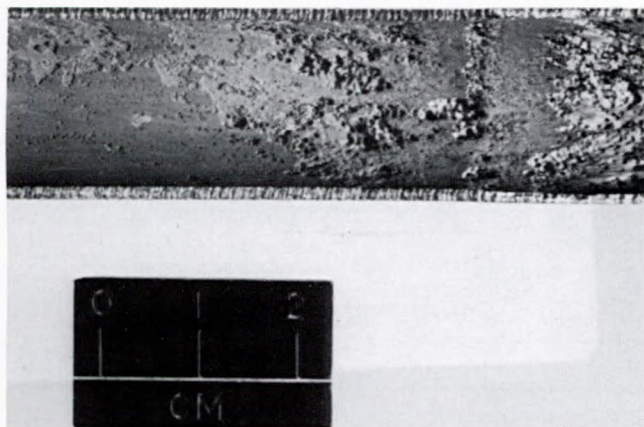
View of the inlet end of an aluminium brass tube pitted by impingement attack
